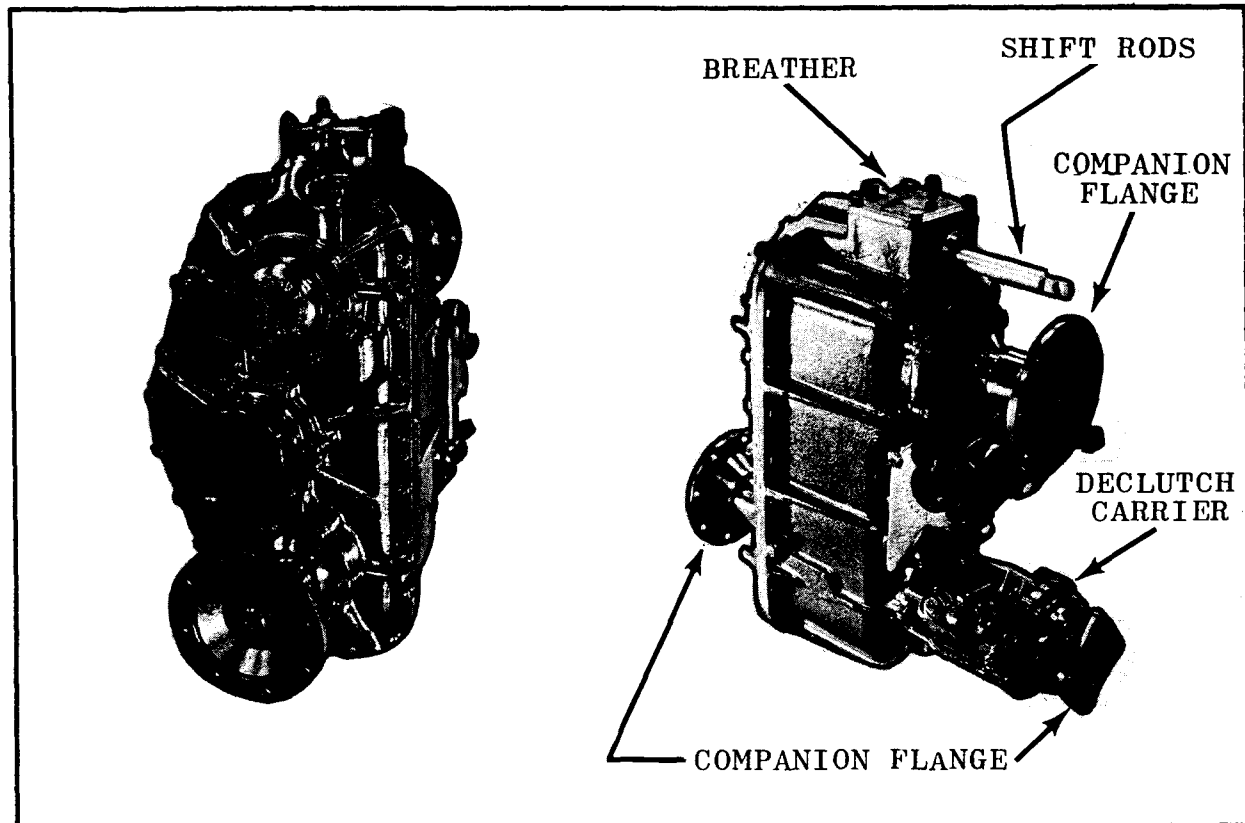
T-76-2 Transfer Case Assembly w/out Power Take-Off
